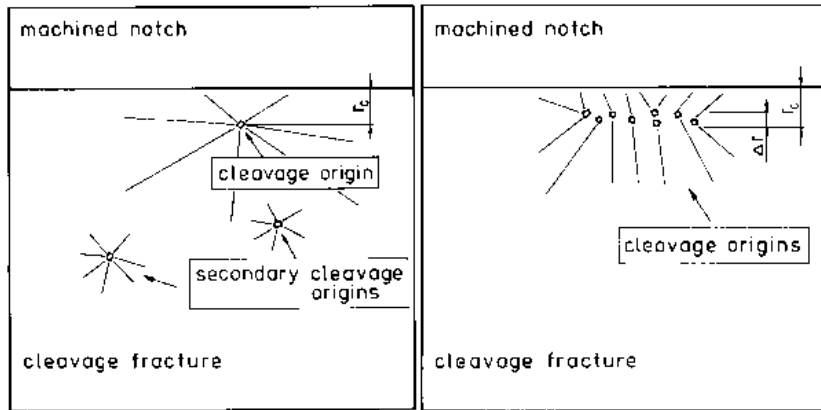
Typical fracture patterns on fracture surfaces for weakest link behaviour (left) and accumulation of damage sites concept (right) [24].
